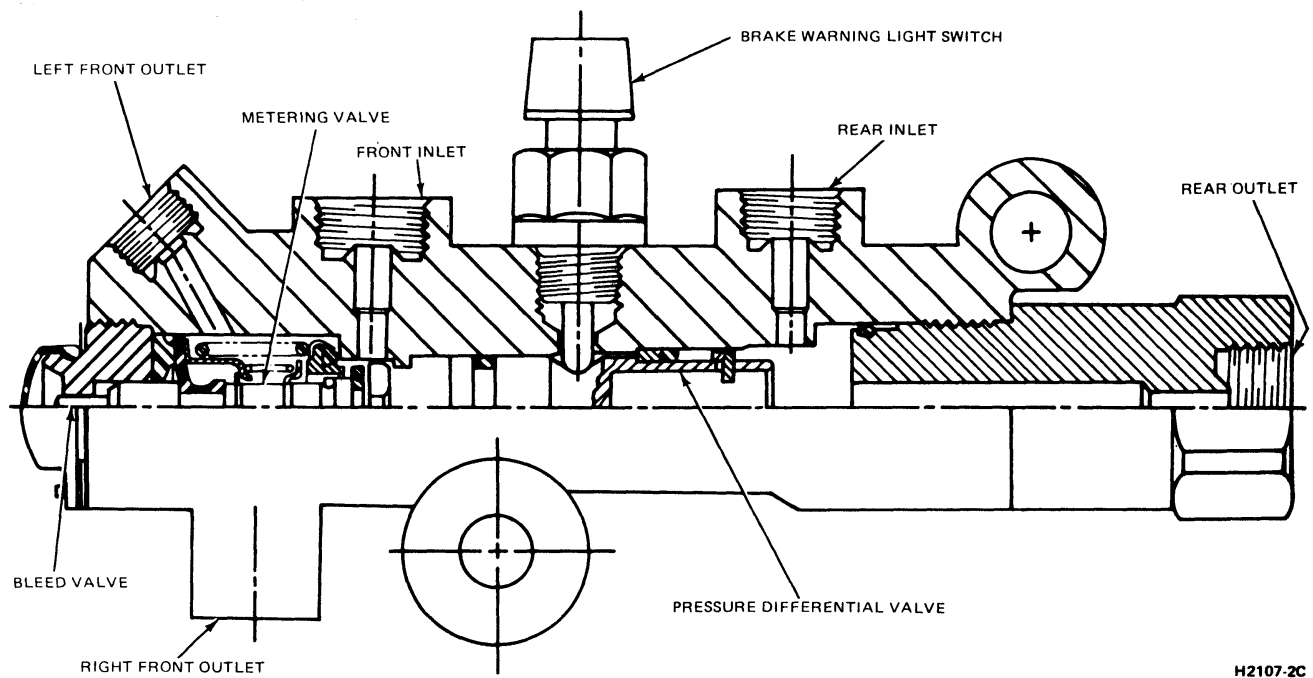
Pressure Differential Metering Valve (Floating Calipers) Disc Brake F-250 (over G.V.W.) F-350 (4x2), E-250, E-350
